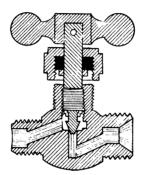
A torch needle valve (Courtesy of: Weldit Acetylene Company)
